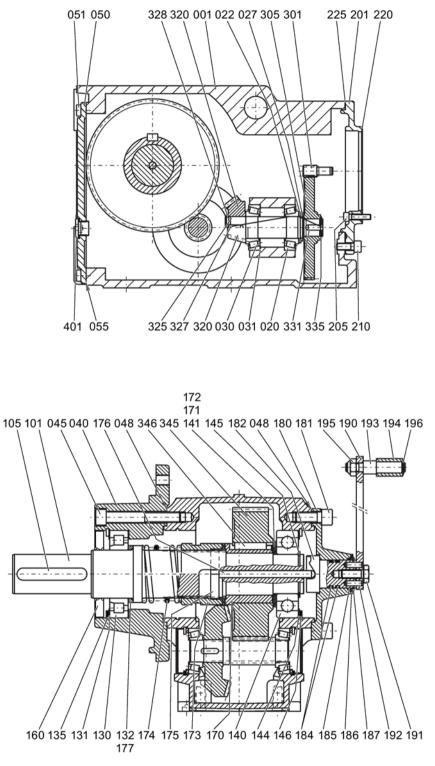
Bevel helical gearboxes KHF48, KHF68, KHZ48
